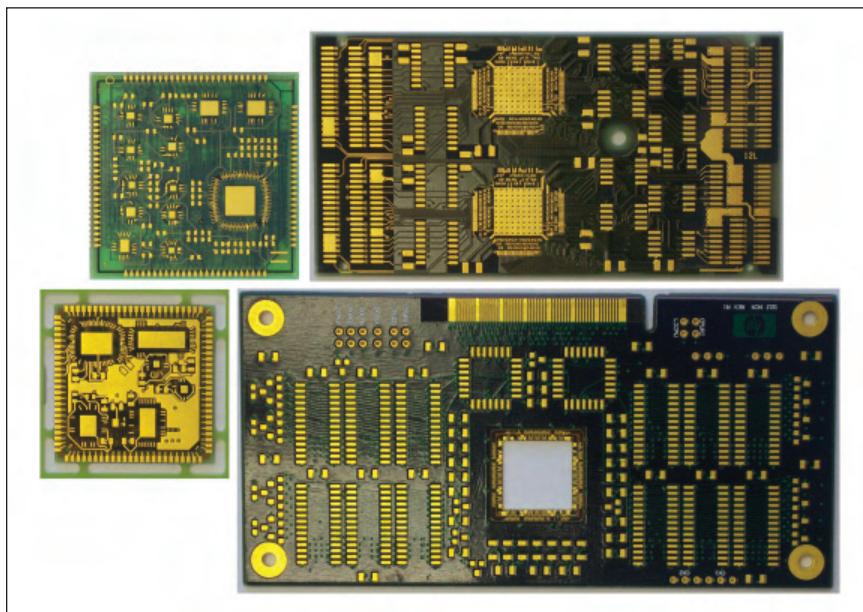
Advanced packaging is being used on PCBs and to package bare silicon.
